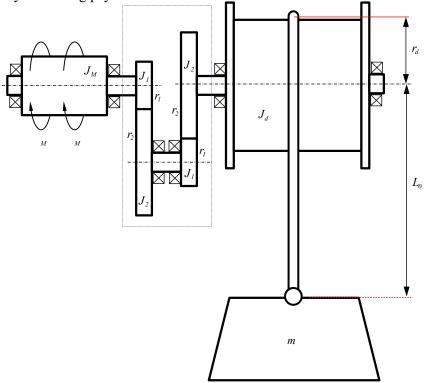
Payload connected via a wire to a drive train that consists of a motor, a gearbox and a drum.
